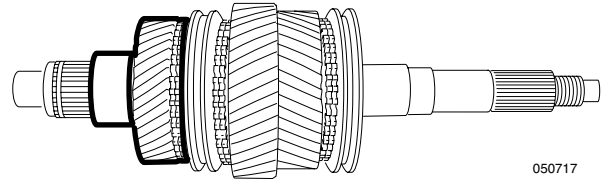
Fitted position of 2nd gear and 3rd gear bush
